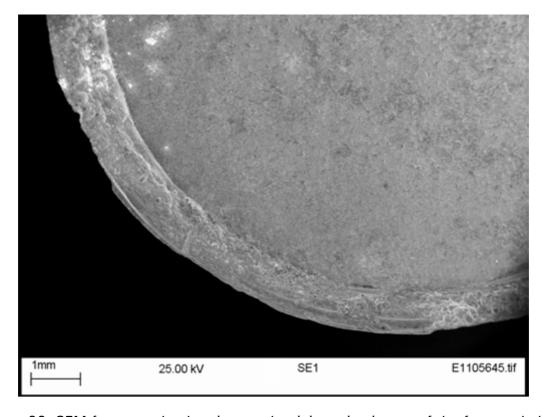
SEM fractograph, showing crack origin region in one of the fracture halves exhibiting fatigue fracture.
